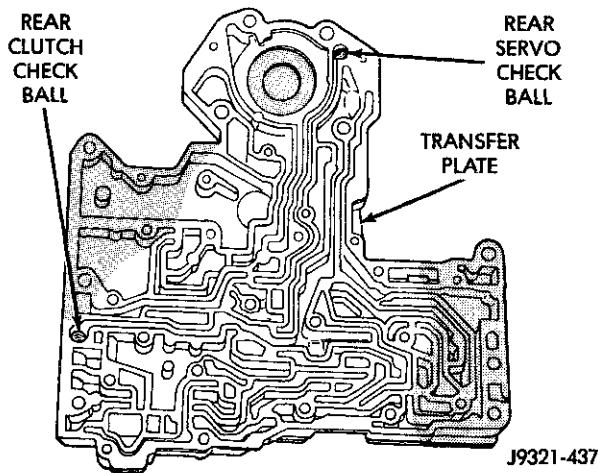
Rear Clutch And Rear Servo Check Ball Locations
